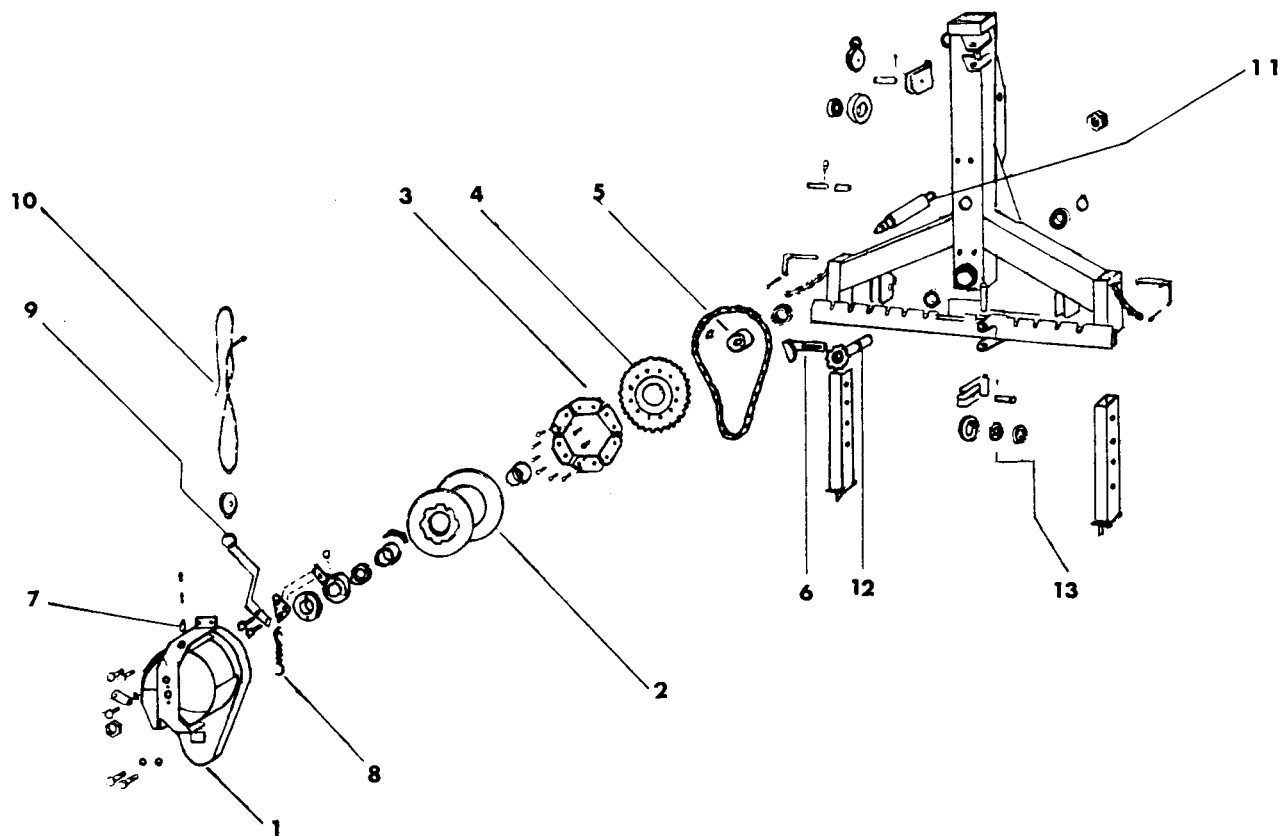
Exploded Diagram of the Farmi Winch. The main components are: 1 = drum guard, 2 = drum, 3 = friction plate, 4 = big chain wheel, 5 = double rolling chain, 6 = chain tightener, 7 = brake, 8 = clutch spring, 9 = clutch lever, 10 = clutch rope, 11 = drum axle, 12 = small chain wheel, 13 = lower pulley.
